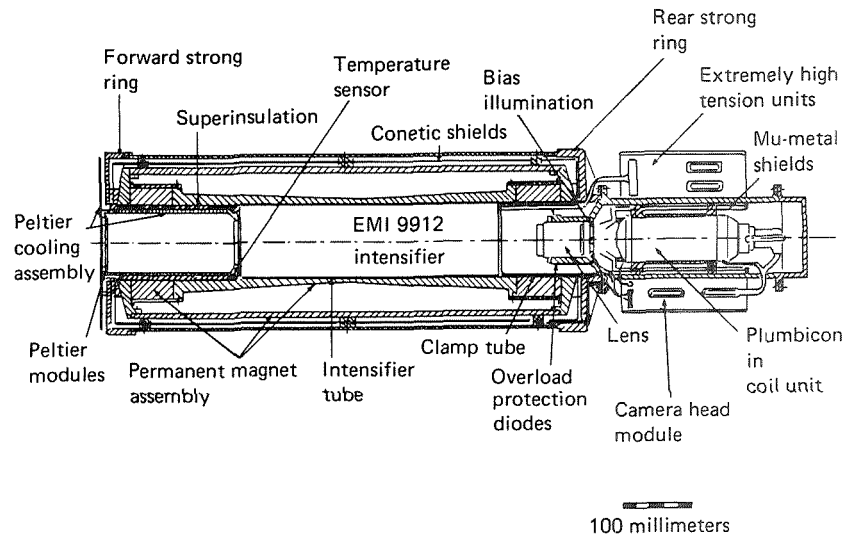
Image Photon Counting System using four-stage intensifier with permanent magnet assembly.
